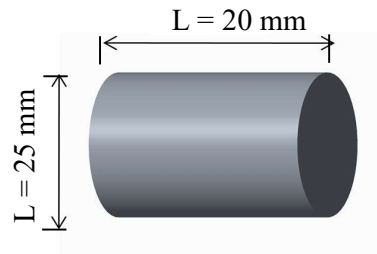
Finishing surface dimensions of cylindrical workpiece
